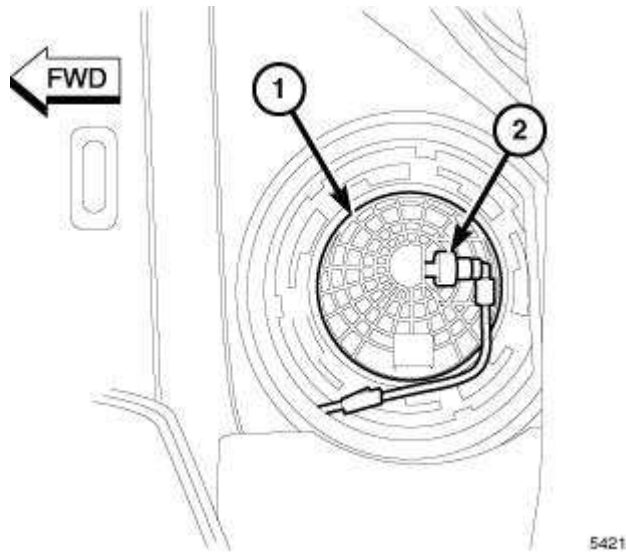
Right Side Auxiliary Fuel Pump Module And Fuel Supply Line
